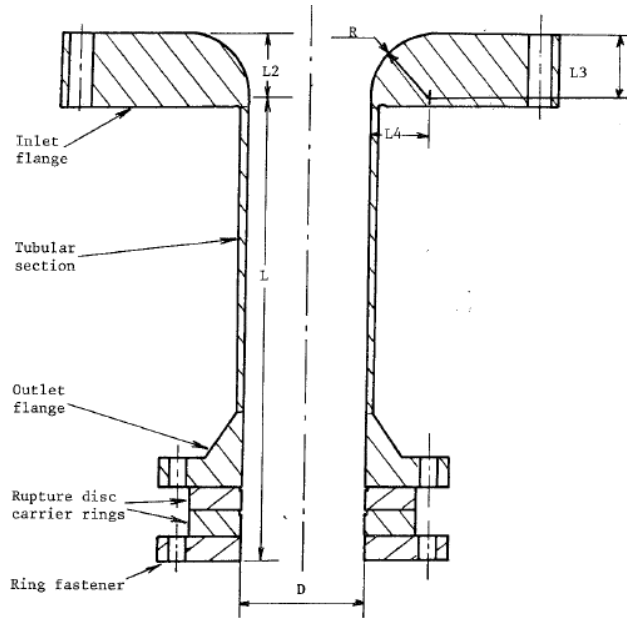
Dimensions of the test nozzle used for tests 15-27 [12]
